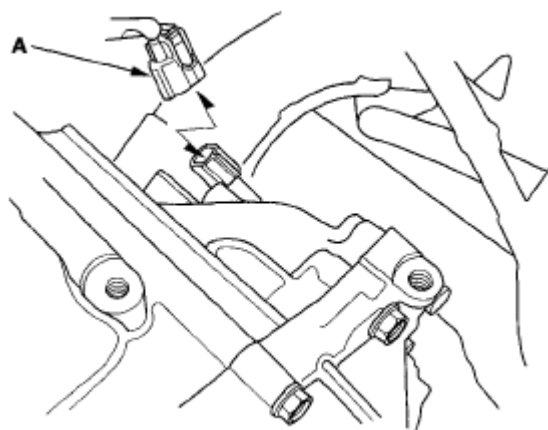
Locating Output Shaft (Countershaft) Speed Sensor Connector
